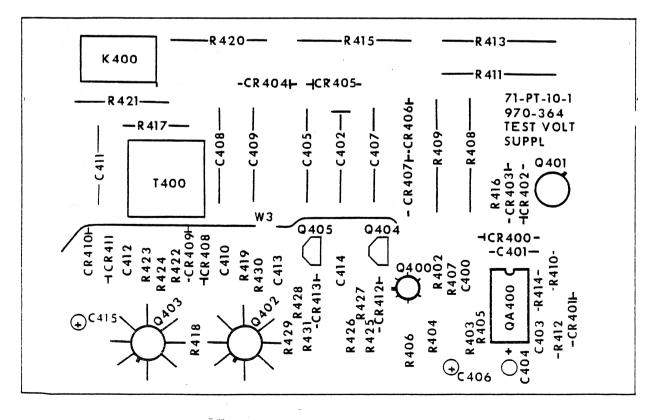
J2 Test Voltage Supply Printed-circuit Board, code 900-373.
